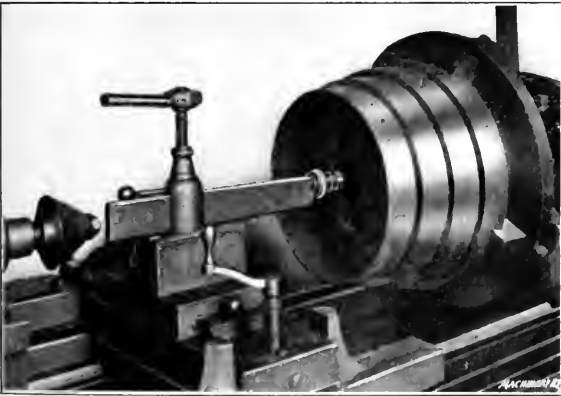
Rolling Babbitt in a Cone Pulley Bearing.
